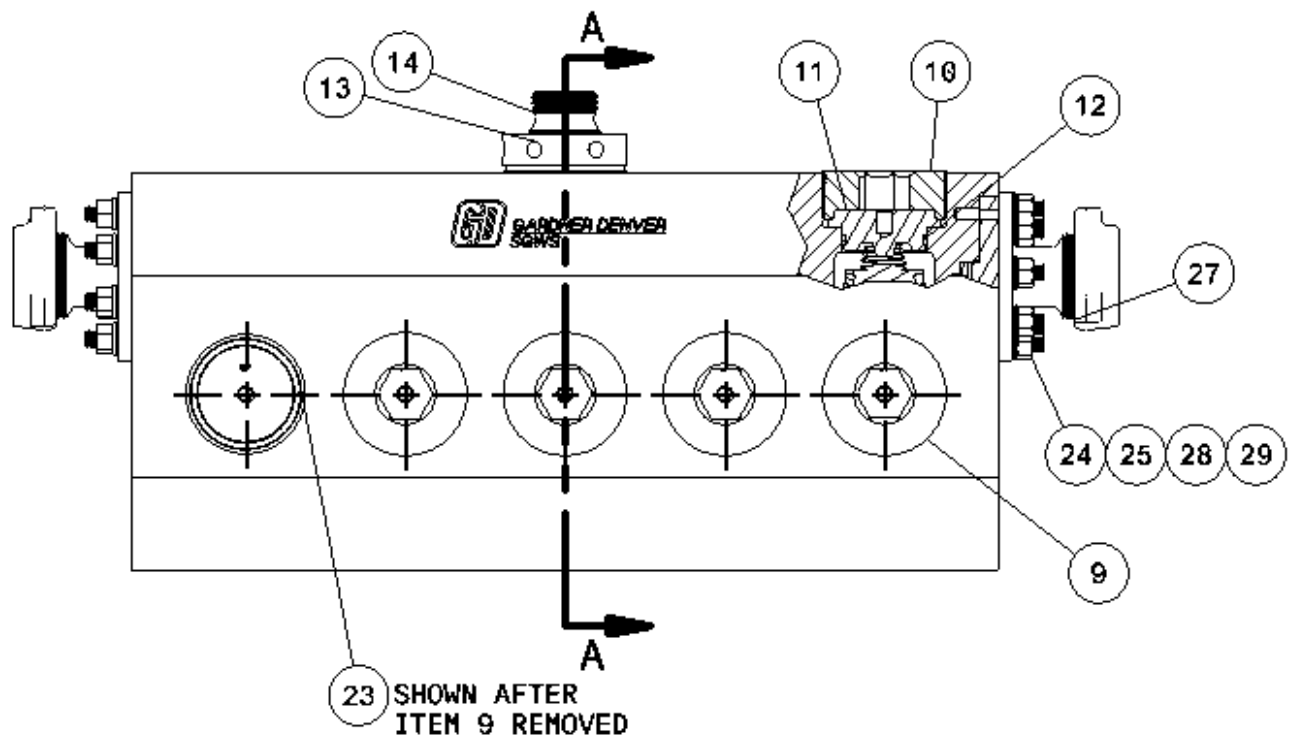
SUPER GWS FLUID CYLINDER FRONT VIEW
